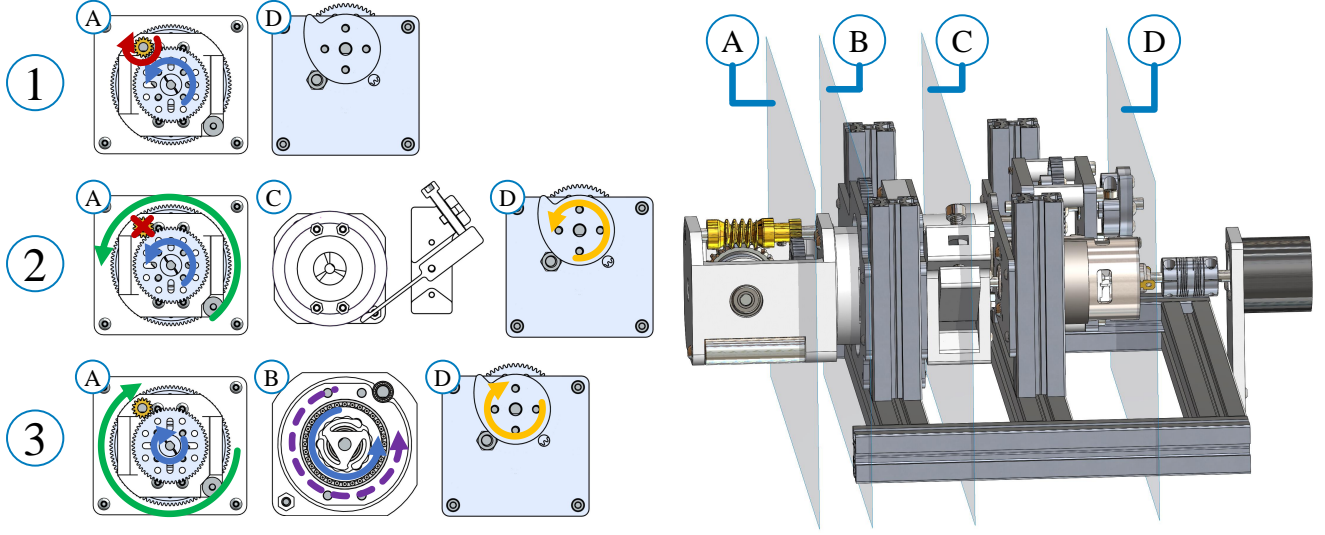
Operation process flow with cross sections of the turret gear system (A), slip clutch and unidirectional roller bearing (B), cantilever beam contact (C), and gearbox dial (D). Step 1: The “sun” gear rotates (blue arrow) via the driveshaft, rotating the “planet” and worm gears to wind the string. Step 2: Increased string load locks the “planet” gear, redirecting motor torque to the turret (green arrow) and string twisting. Rotational friction can be adjusted via the cantilever contact (C), and turret rotation turns the gearbox dial away from a hard stop (orange arrow). Step 3: Motor reverses direction to untwist. Torque is transmitted via a unidirectional bearing oriented such that the turret rotates first (purple arrow), allowing pure untwisting until dial hits the hard stop. The slip clutch inside unidirectional bearing then begins to slip, allowing pure unwinding.
